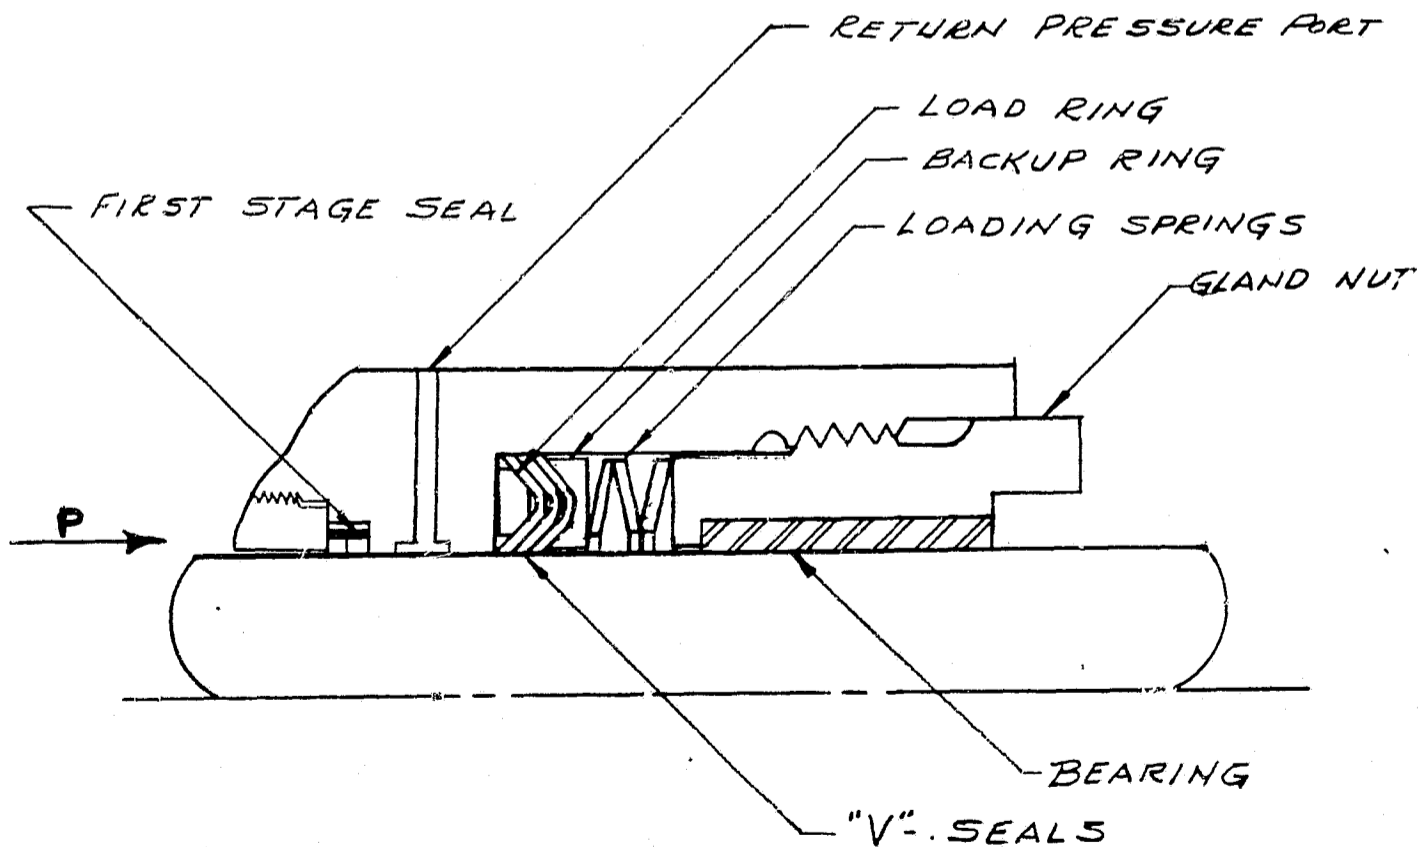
Design B - Polyimide V Seal-Low Pressure
